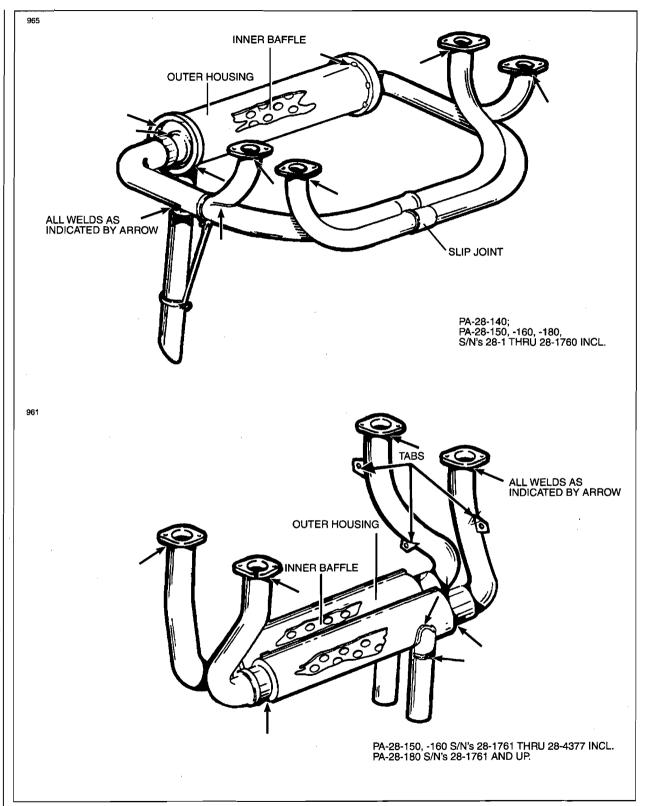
Exhaust System Inspection Points (Sheet 1)
